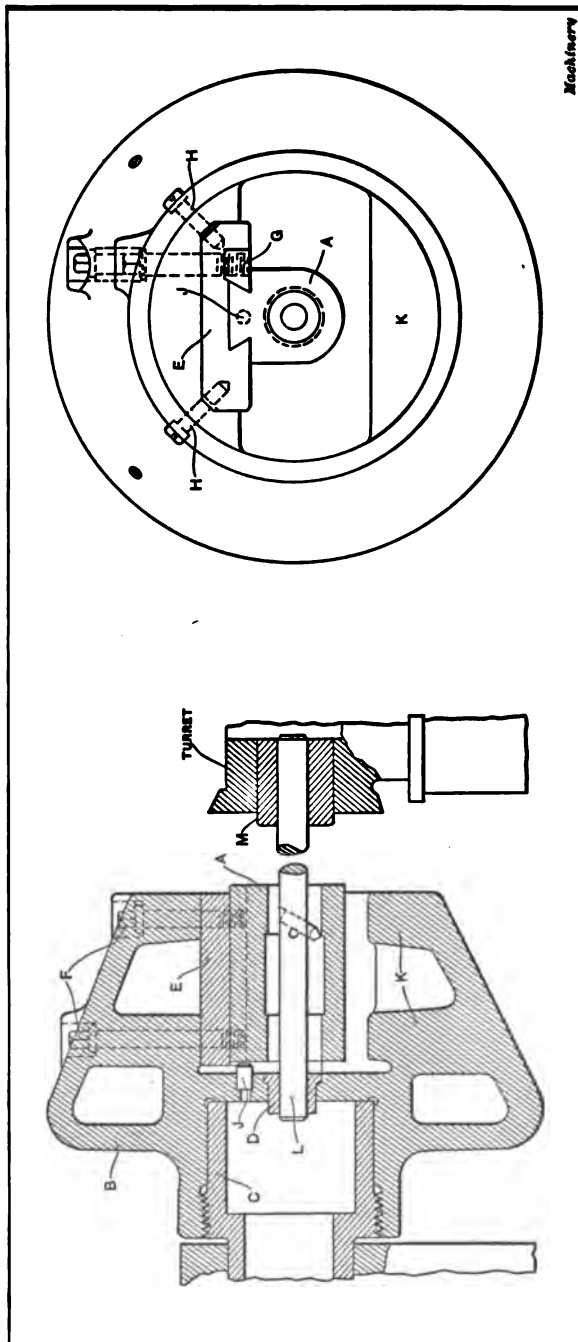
Fixture for Boring Small Bronze Castings on Horizontal Turret Lathe
